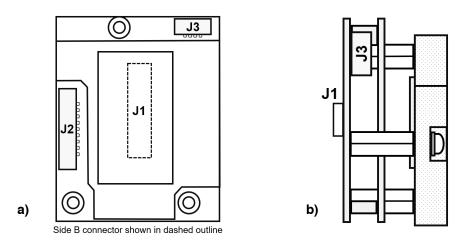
Harrier PoE Connection Board diagram. a) Top view b) Side view with heat sink.
